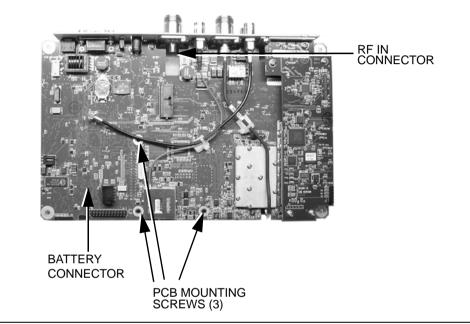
Main PCB (shown with T1/E1 PCB installed)
